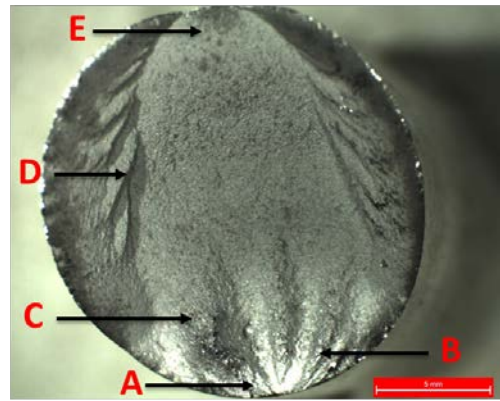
Fractograph of "As Machined"/T6 Test Specimen 2
